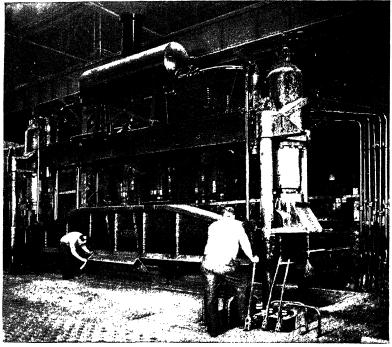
Five hundred-ton bending brake. The workman in the background is checking a dimension. Cold-working in this way can give relatively good accuracy. (Bethlehem Steel Co.)
